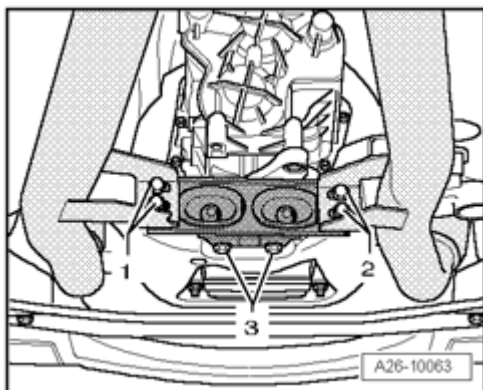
Removing/Installing Mounting Bolts For Front Exhaust Pipes
